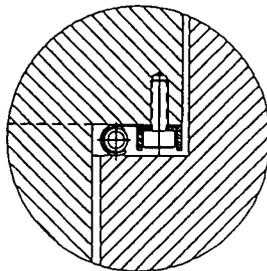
Multi-Canister Overpack Assembly Welded Closure.
